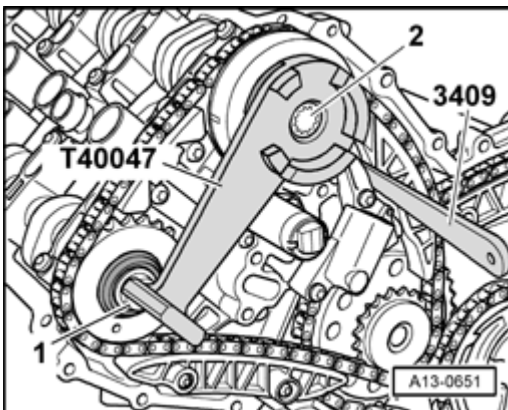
Securing Hall Sensor Wheel On Camshaft Adjuster Of Intake Camshaft Of Left Cylinder Head Using Setting Gauge T40047
